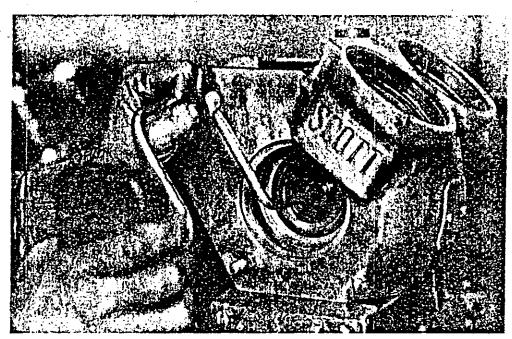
Grinding in Packing Glands on Scott Engine before Reassembly.
